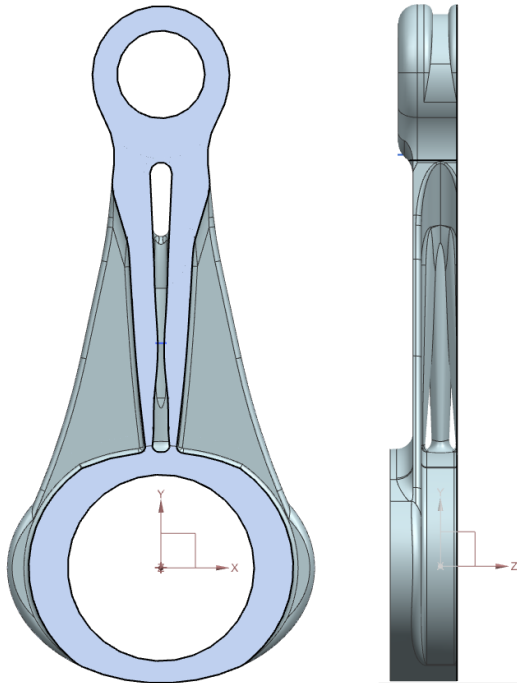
Cross-sections of 2.1 beam about Z-axis; Outer cut.
